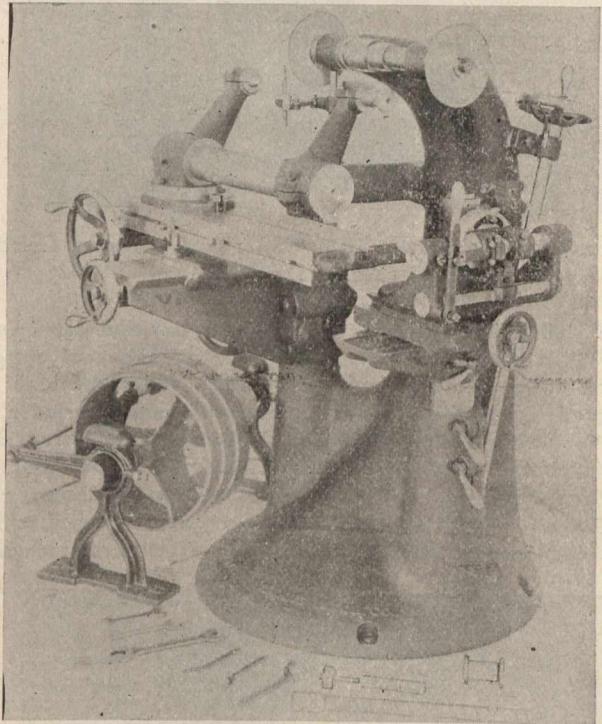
No. 1. Fourteen-inch Cutter and Reamer Grinder.
